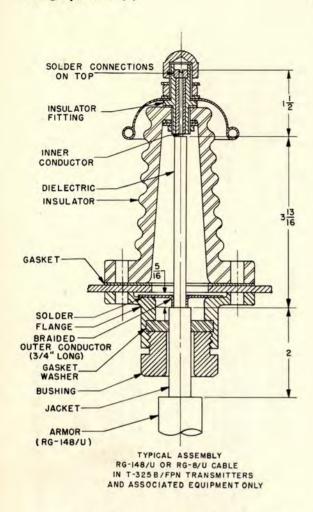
End-Seal Termination of Coaxial Cable (Cont'd.)
